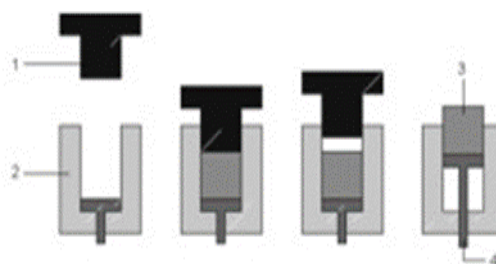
Mechanism of Direct Squeeze casting (DSC)
